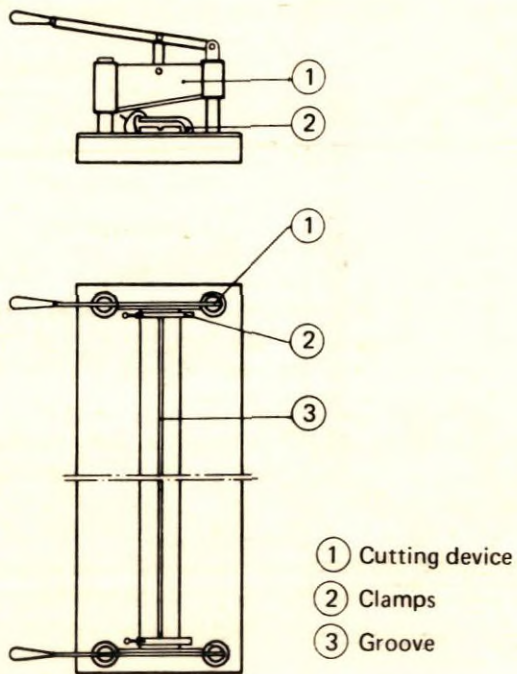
Apparatus for cutting test pieces (Method A)
